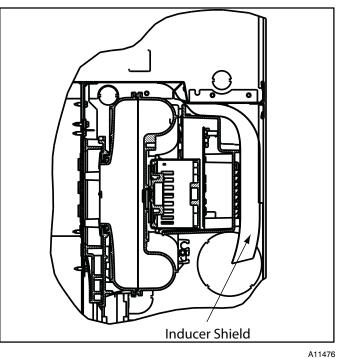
Inducer Shield Cross Section (Actual Inducer will vary)
